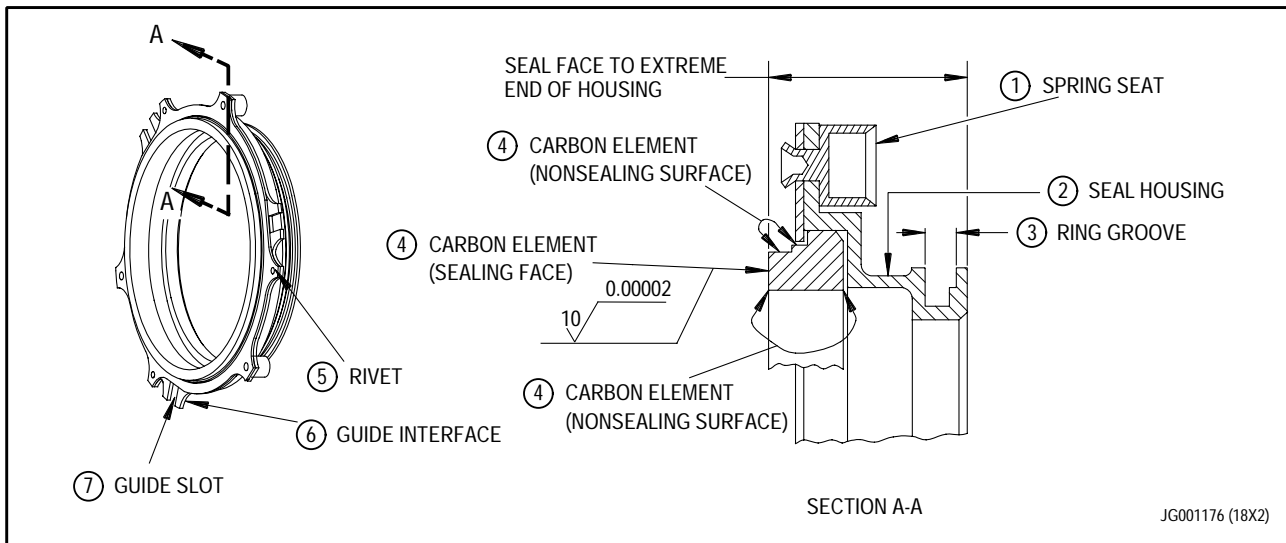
No. 2 Bearing Front Face Seal Assembly - Inspection (PN 4072837 or 4072839 Typical)
